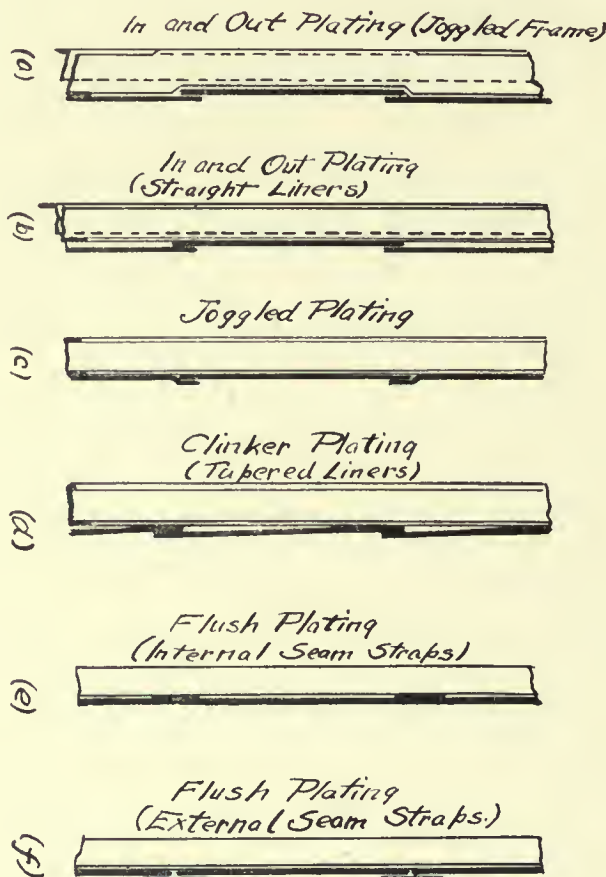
A—METHODS OF FITTING HULL PLATING TO FRAMES
